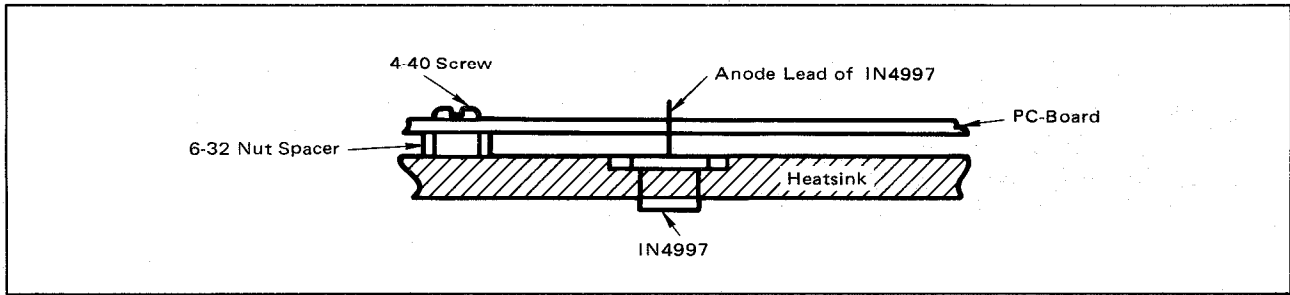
Mounting Detail of IN4997 and 6-32 Nut (Spacer)
